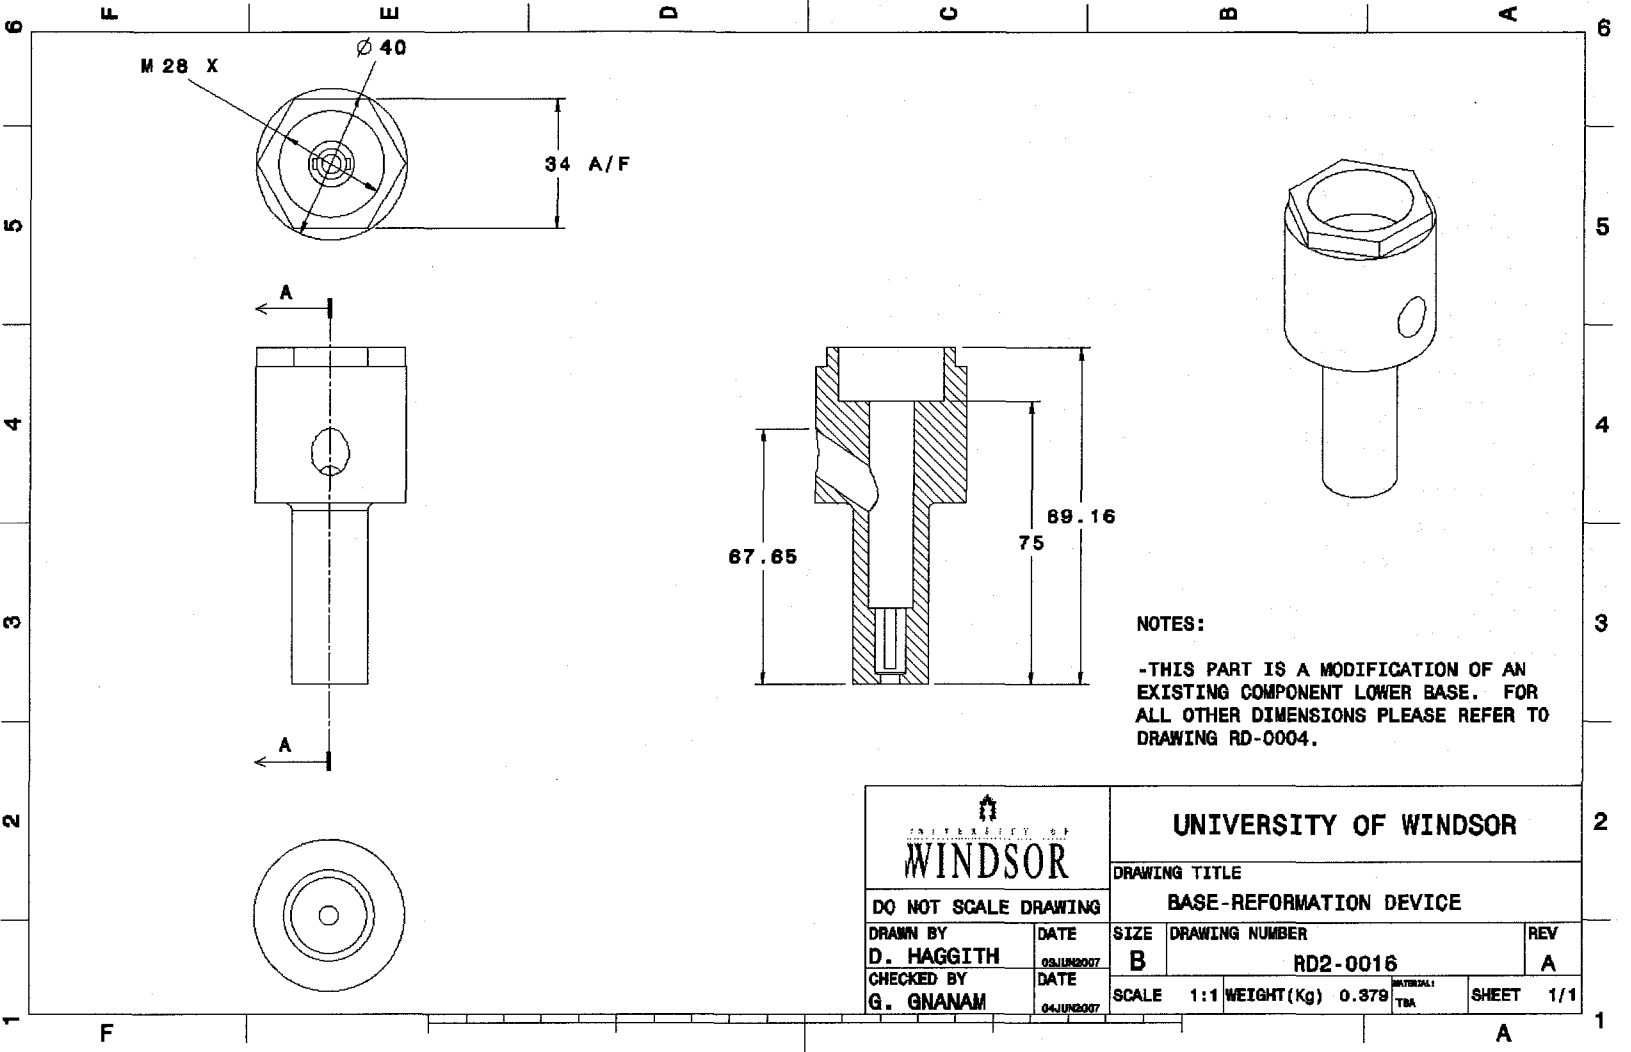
Lower base restored from first proto-type- Item 1 in assembly drawing (second proto-type).
